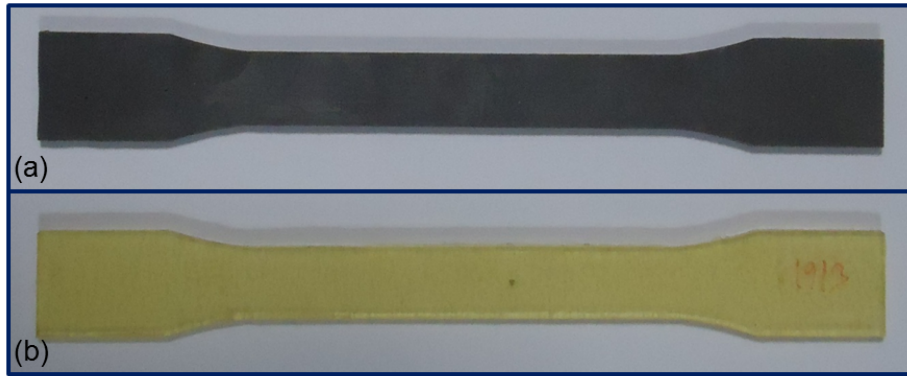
Adhesive specimen casting (a) Araldite AV138 / HV998 specimen (b) Araldite 2011 specimen
